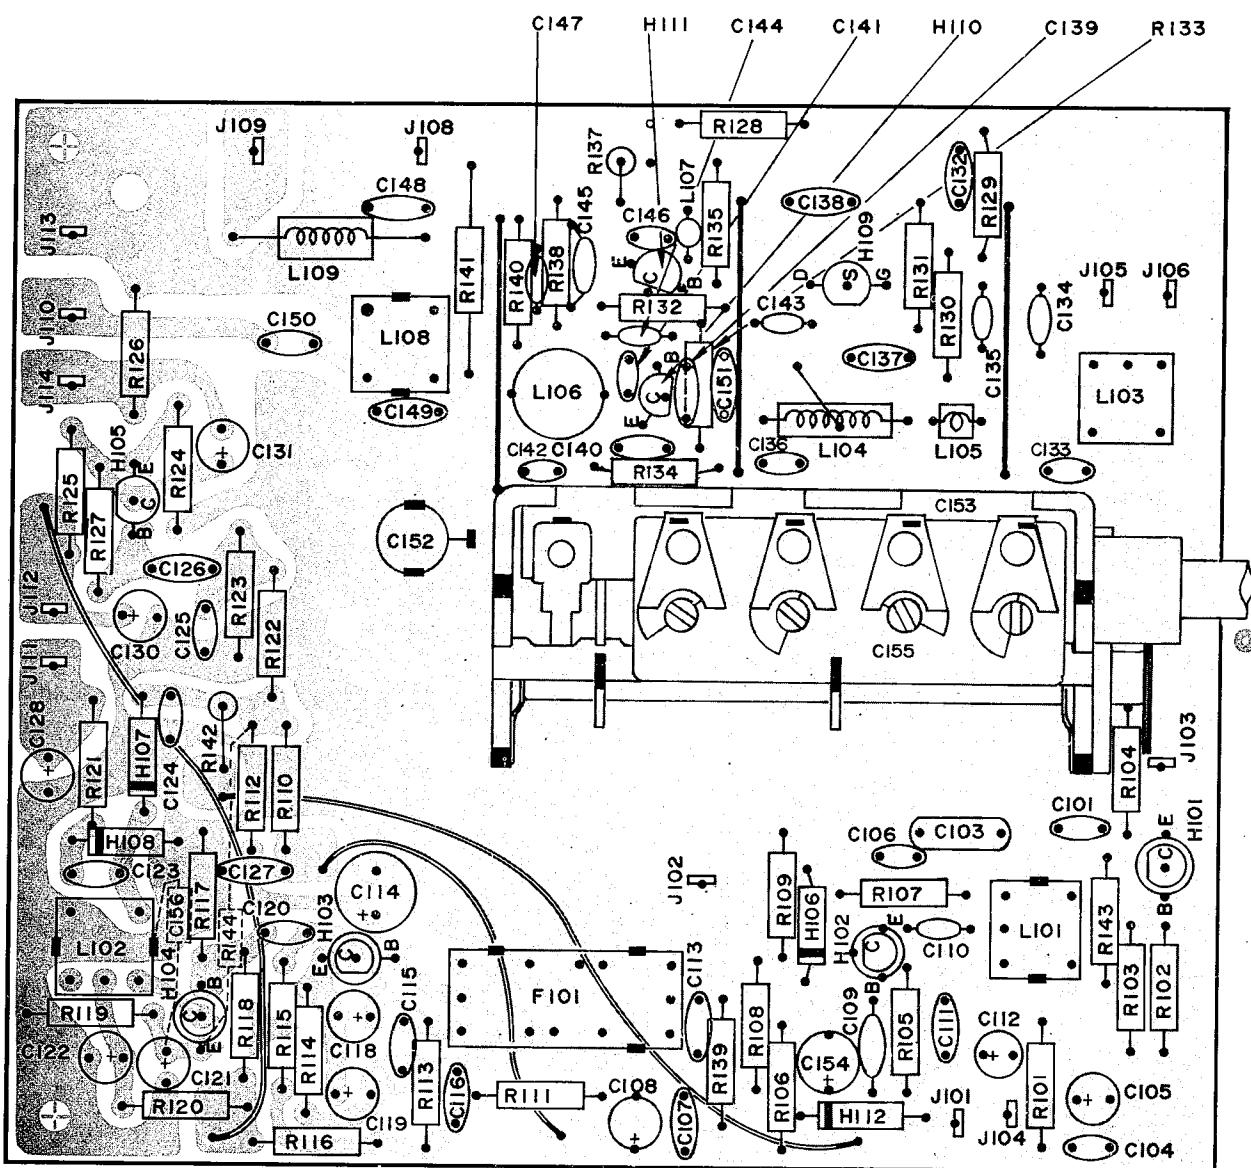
FM Front End and AM Tuner Assembly P100 Component Locations
